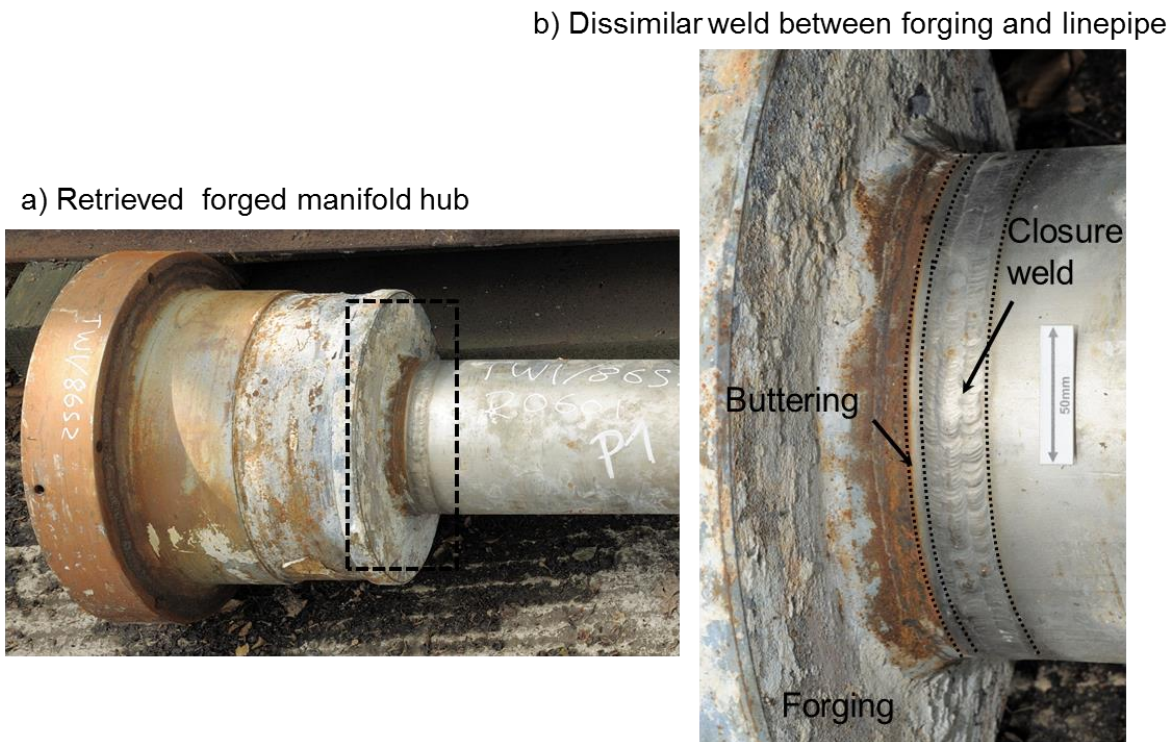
a) A typical commercially produced manifold hub, welded with dissimilar filler metals to a linepipe. b) Detailed view of the dissimilar weld with 50mm scale marker. The forging is composed of 8630 material, whilst the buttering and closure weld are Alloy 625.
